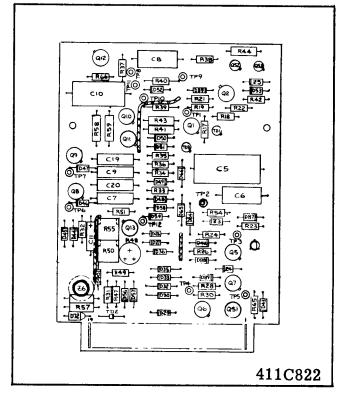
Printed Circuit Board Assembly for SDG-1 Relay
